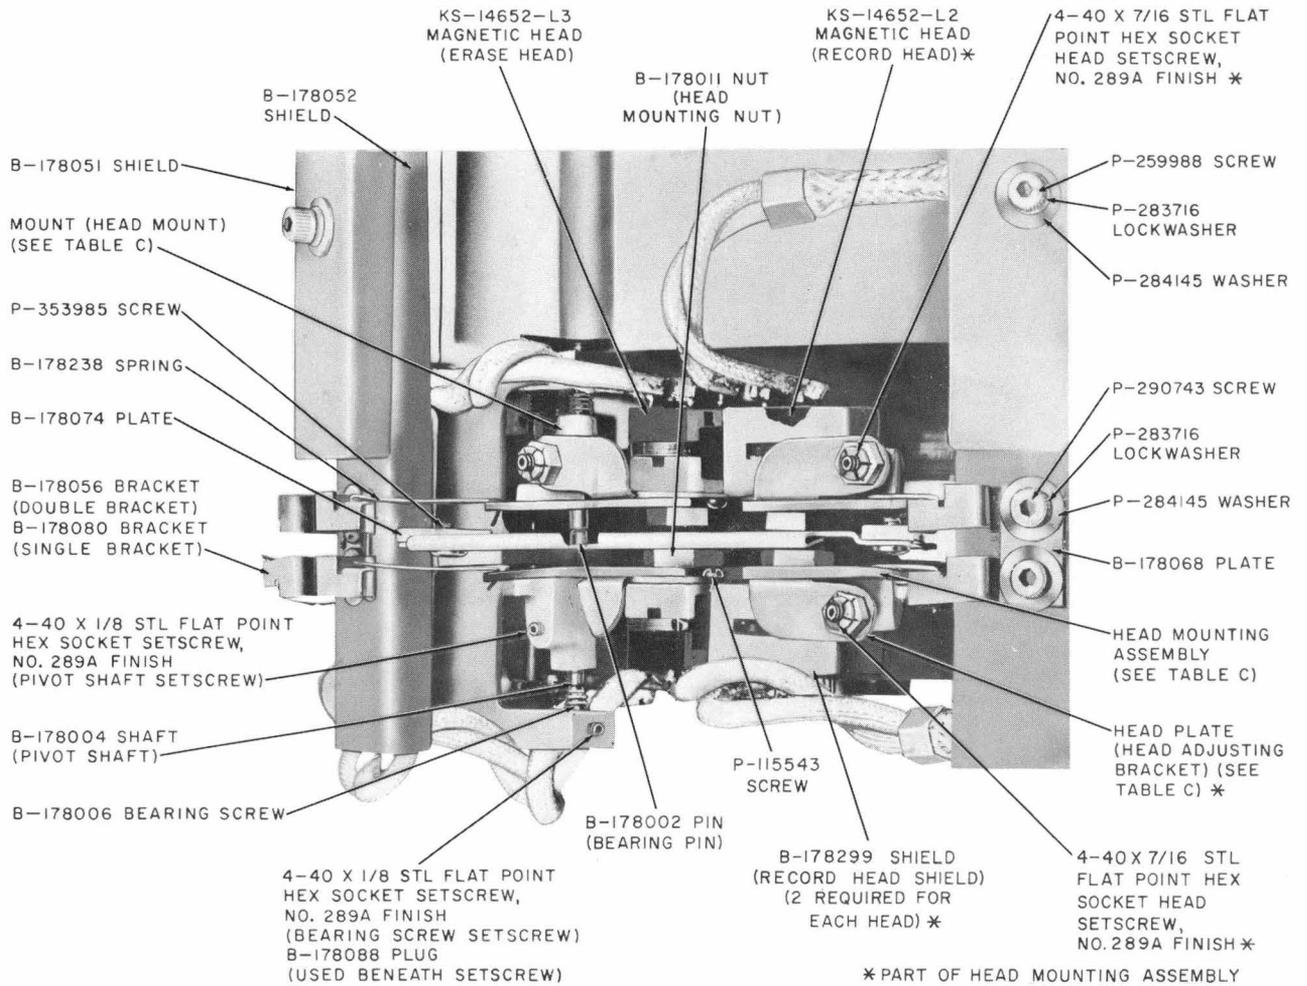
KS-12068 L4, L5, and L6 Recorder-Reproducers — Record and Erase Head Assemblies and Associated Parts
